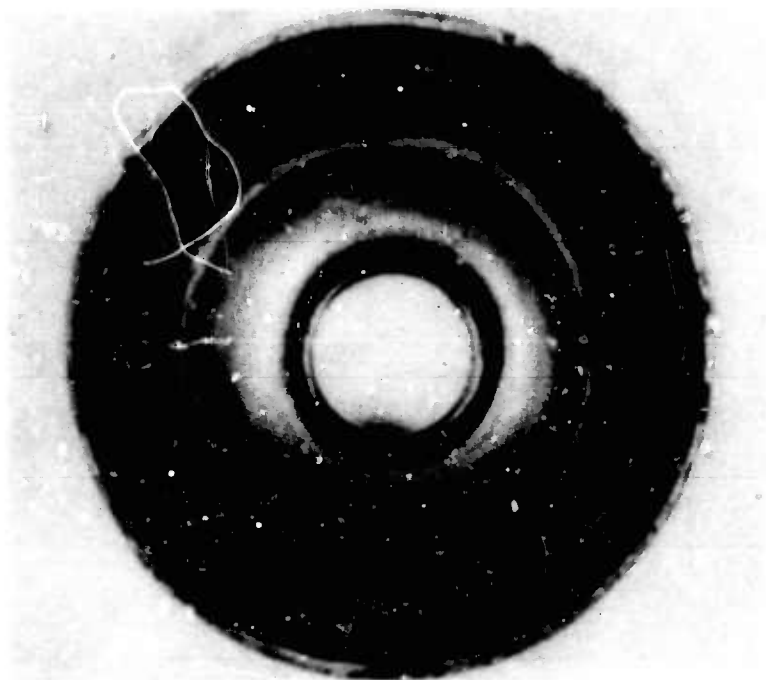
Condition of Constant Velocity Joint Inner Surfaces. Note that Seal is Fuzed to Seal Seat.
